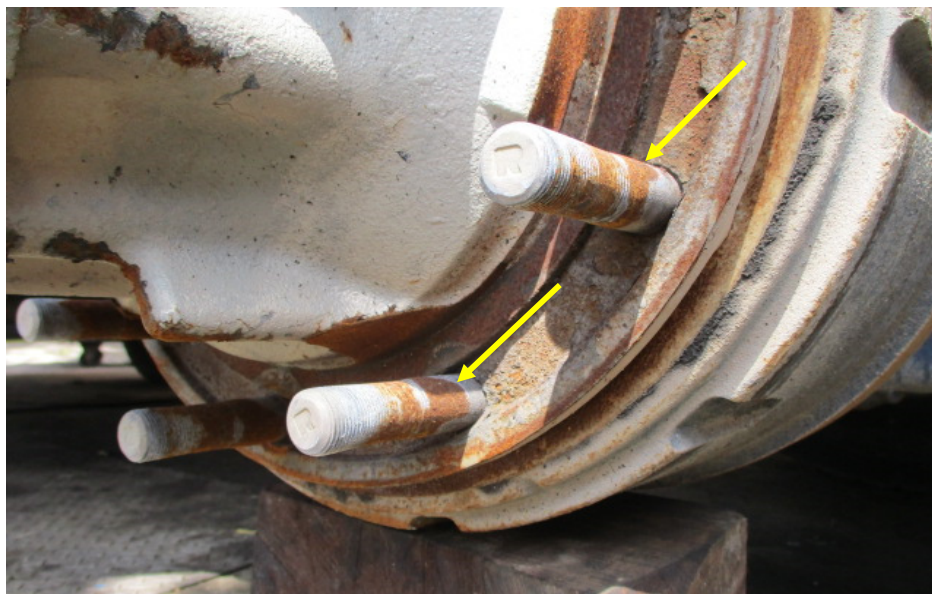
shows a general view of the other remaining unbroken wheel bolts. Similar to the broken wheel bolt, rust (arrowed) was also seen on the tread area of the remaining 9 unbroken wheel bolts. The rust seen on all 10 wheel bolts could have developed due to the bolts being exposed to natural environmental condition during the 3 months plus period when the Insured Vehicle was impounded by Traffic Police. However, upon review of the incident scene photographs, the broken surface area of the broken wheel bolt appears to be already rusted before the Insured Vehicle was impounded (refer to photograph 11 below).
